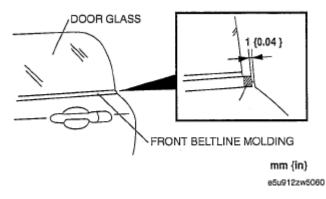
Identifying Door Glass With Clearance Courtesy of MAZDA MOTORS CORP.
